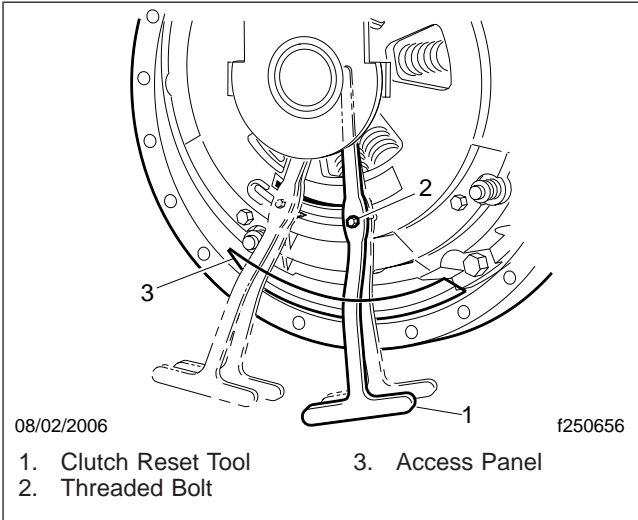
, Resetting the Clutch with the Clutch Reset Tool
